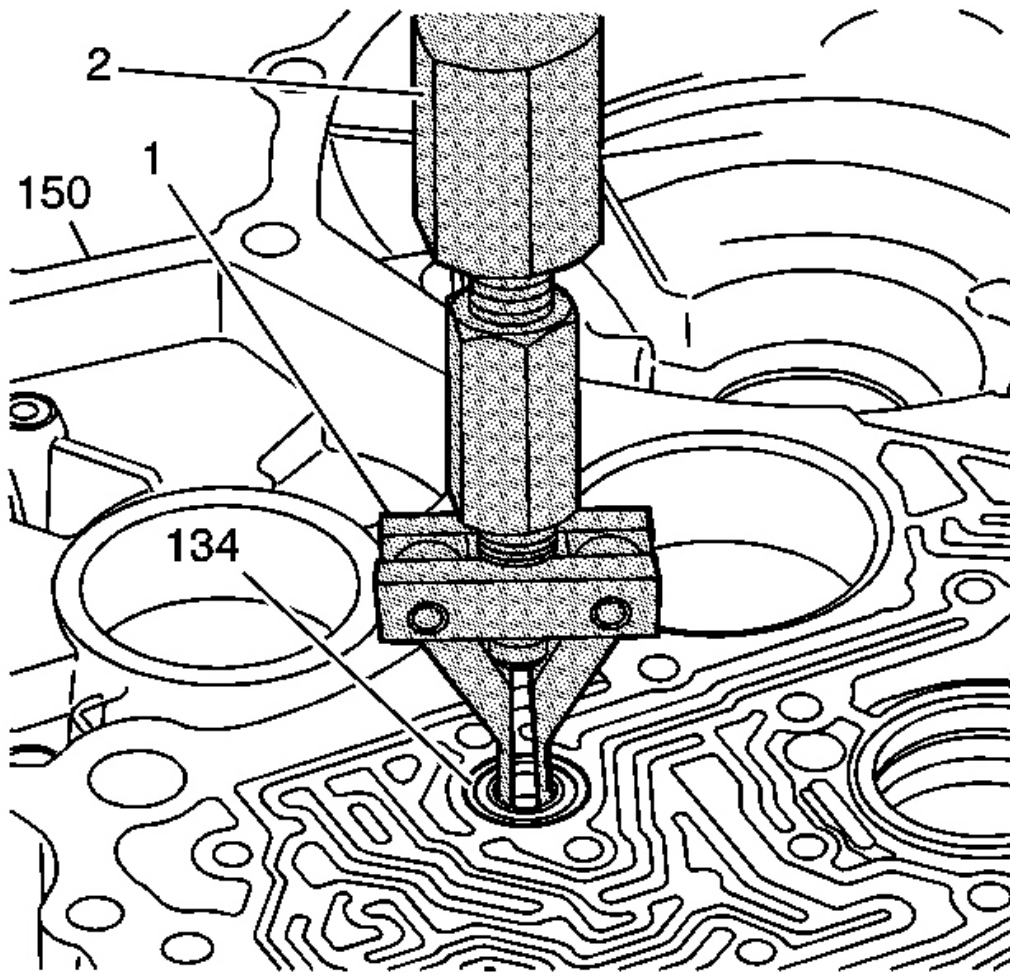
DT 46424, SA9133T-1 & Park Pawl Actuator Shaft Front Bearing
